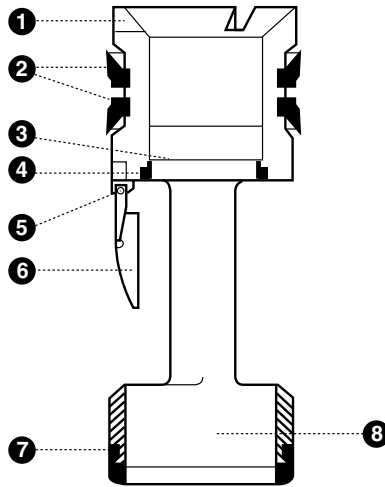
Schematic of a typical flapper type float valve for direct circulation operations. 1) Cage, 2) side seal, 3) seal retainer, 4) seal, 5) pin, 6) flapper valve, 7) shock absorber, and 8) location of bevel guide (courtesy of Baker Oil Tools).
